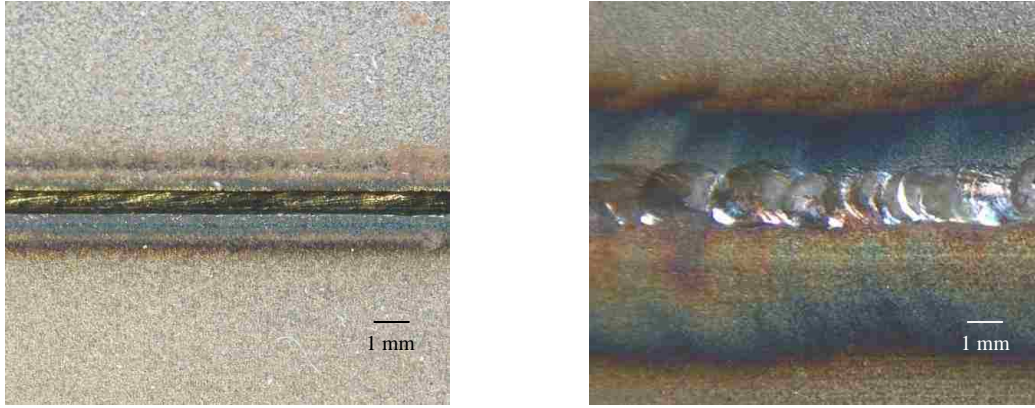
Weld top surface obtained using laser and TIG welding
